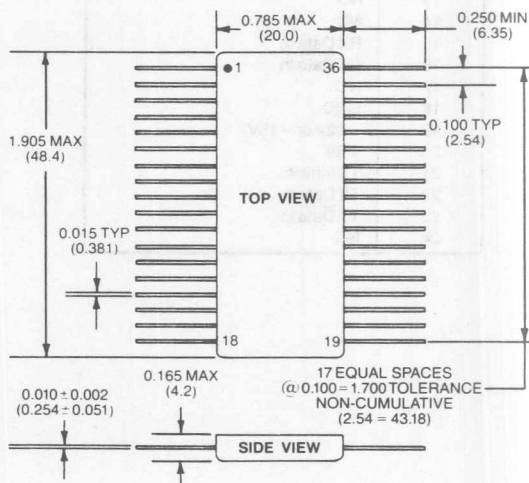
BUS-63126 II, BUS-63128 II, BUS-63136 II, AND BUS-63138 II MECHANICAL OUTLINE-36 PIN FLATPACK
